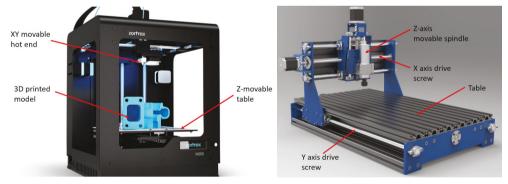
Example of FDM Zoltrax 3D printer (source: www.drukarki-3d.info) and 3D router
